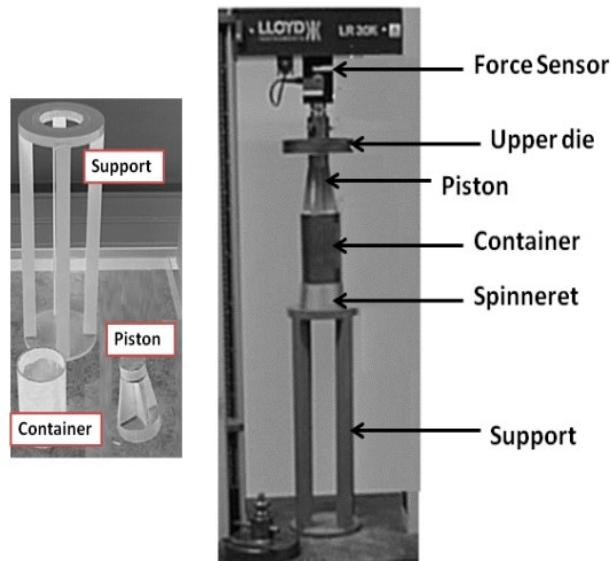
Setup used for preparation of plasticine cylindrical workpiece.
